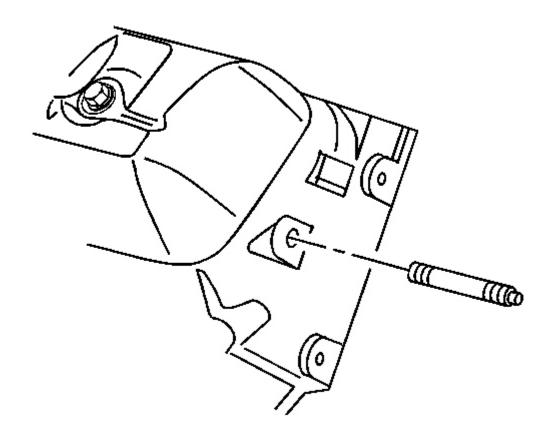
View Of Generator Bracket Stud Courtesy of GENERAL MOTORS CORP.
